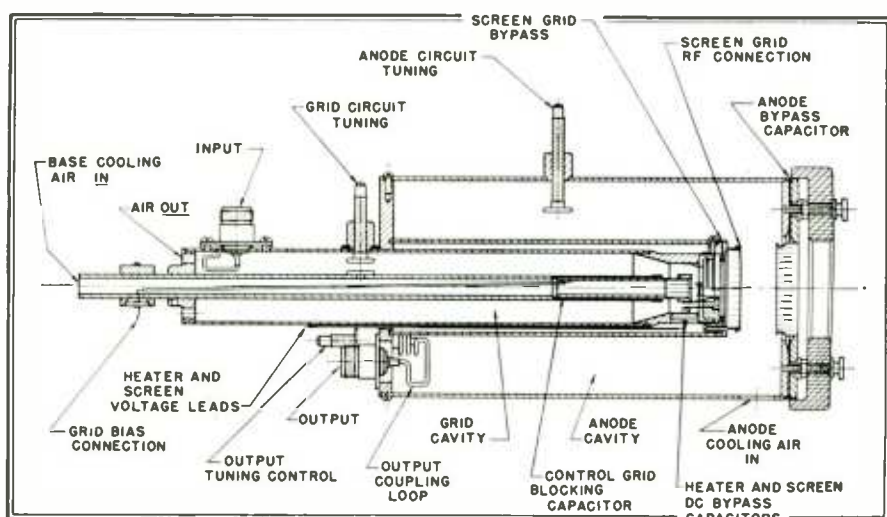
A cross-section view of the doubler stage, illustrating the assembly of the socket and resonators, and the two air inlets for cooling the base and anode
